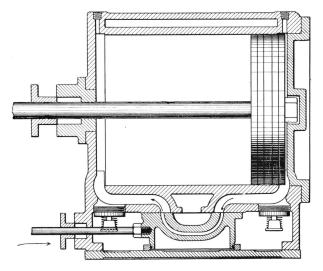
SECTIONAL PLAN OF VACUUM CYLINDER. PISTON AT END OF STROKE.
